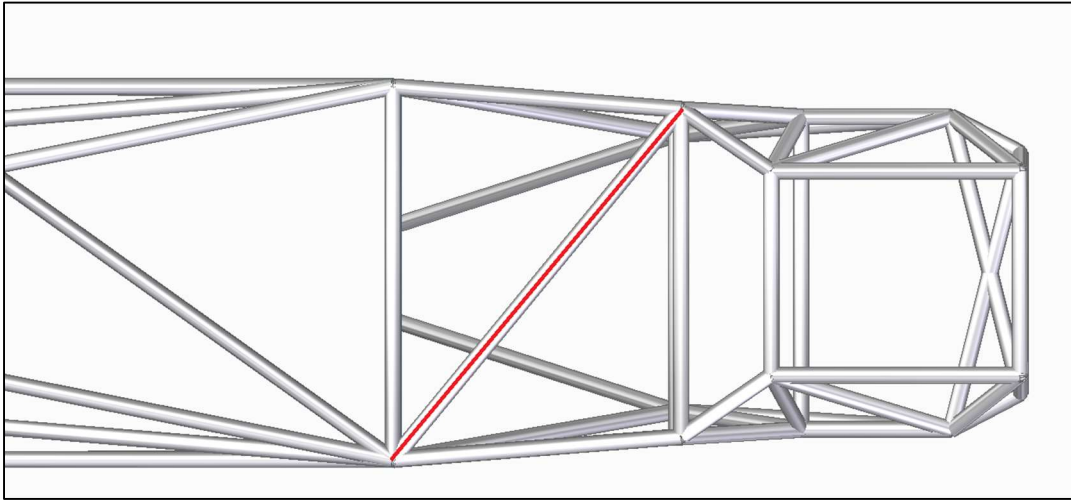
Bottom View of Chassis with Added Cross Member Shown in Red
